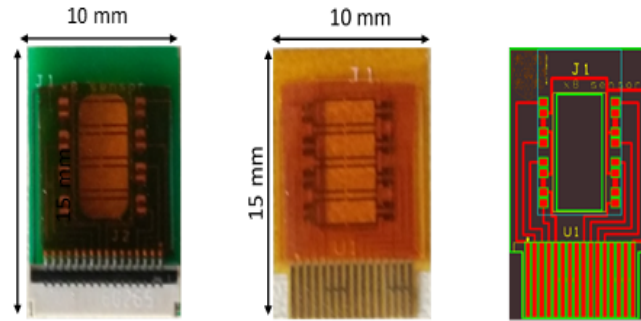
Rigid PCB with IDE sensor (left), Flexible interposer with IDE sensor (middle), Interposer schematic (right)
